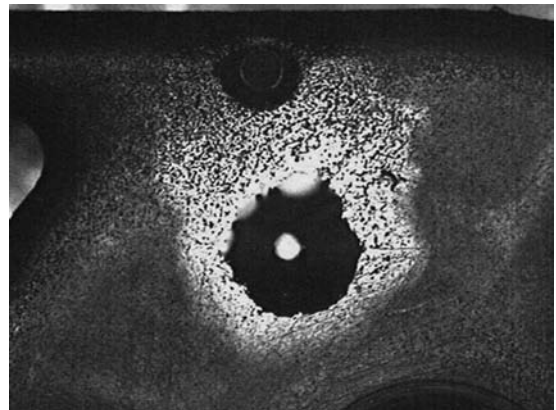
Time-lapse photograph of a sintered bearing impregnation fluid on an injection molded component surface (end of test).
